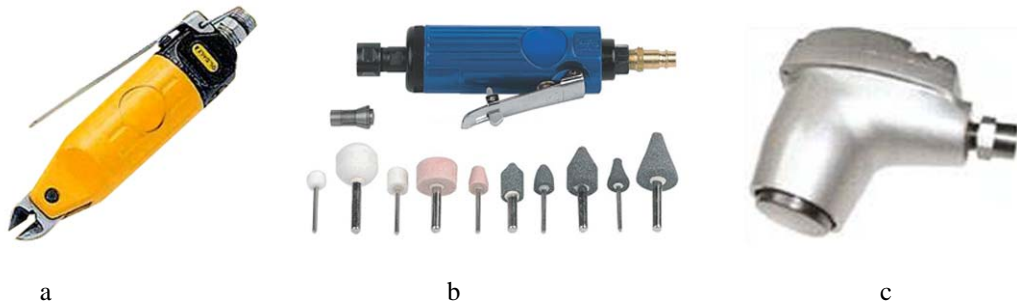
Pneumatic instruments for smoothing the spacer grid tearing: nippers (a), polishing machine (b), “hammer” (c)
